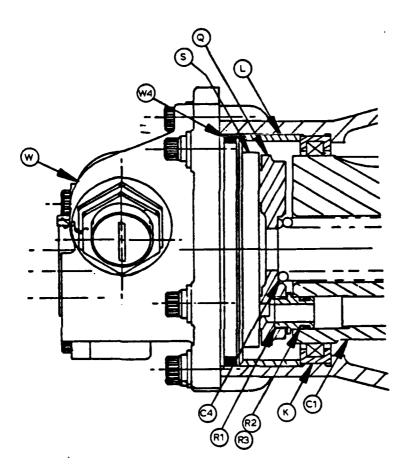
Side View - Showing Transfer Tubes, Cylinder Block Bearing and Valve Block Assembly
